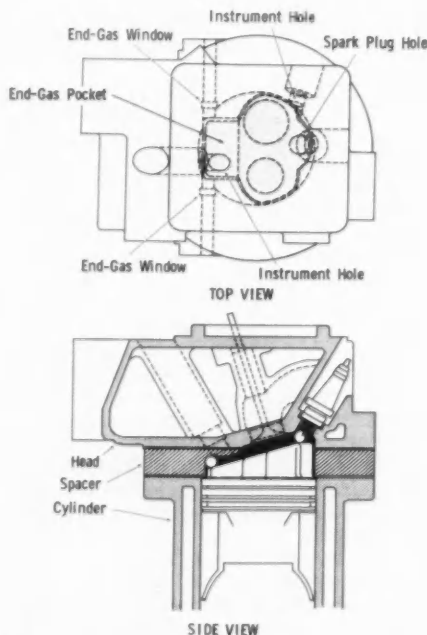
Sandwich-head engine combustion chamber with piston at top center.
